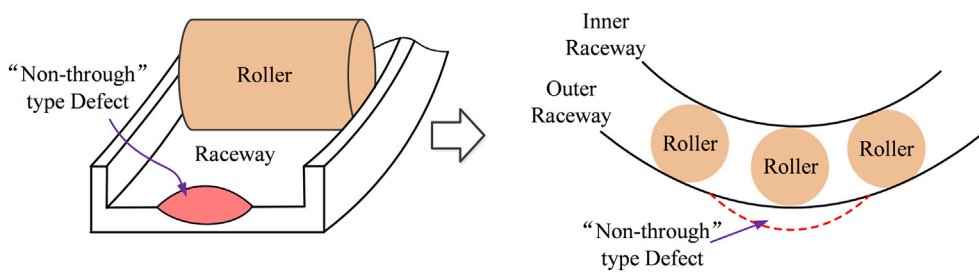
The model of "non-through" type defects of roller bearing.
